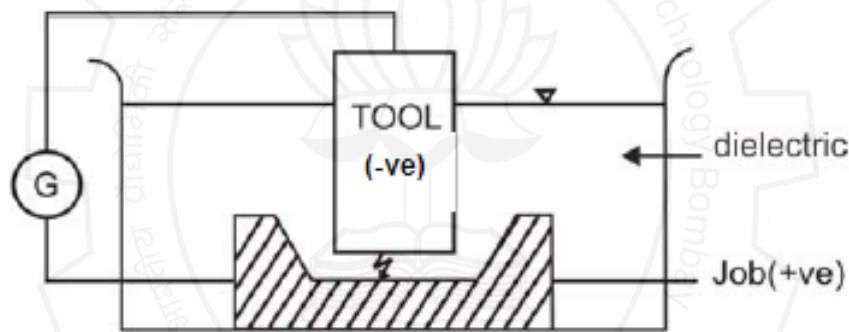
Schematic depiction of Electrodischarge Machining [3]
